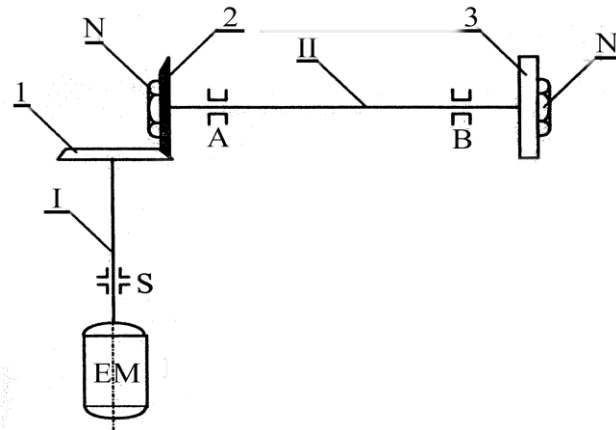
Hydraulic unit shaft with conical clamping rings for connection with interchangeable gears
